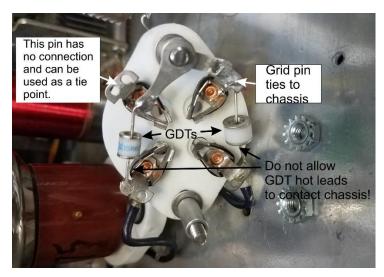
GDTs remove outer tube socket add lug(s) and GDT AL 811 only
